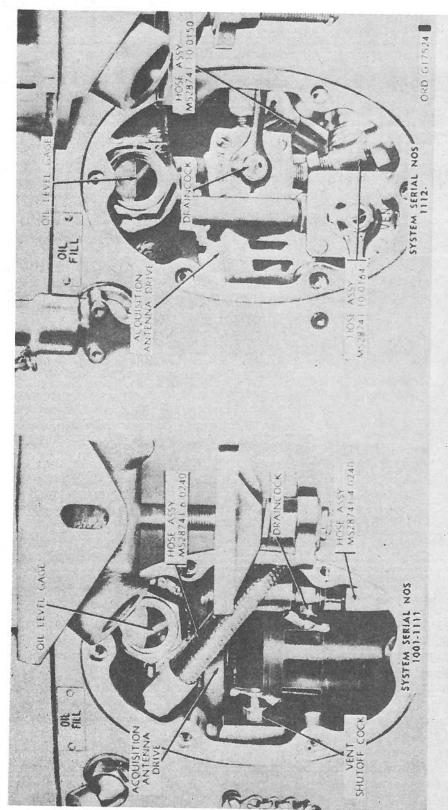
Acquisition antenna pedestal - side view - antenna drive access door removed.
